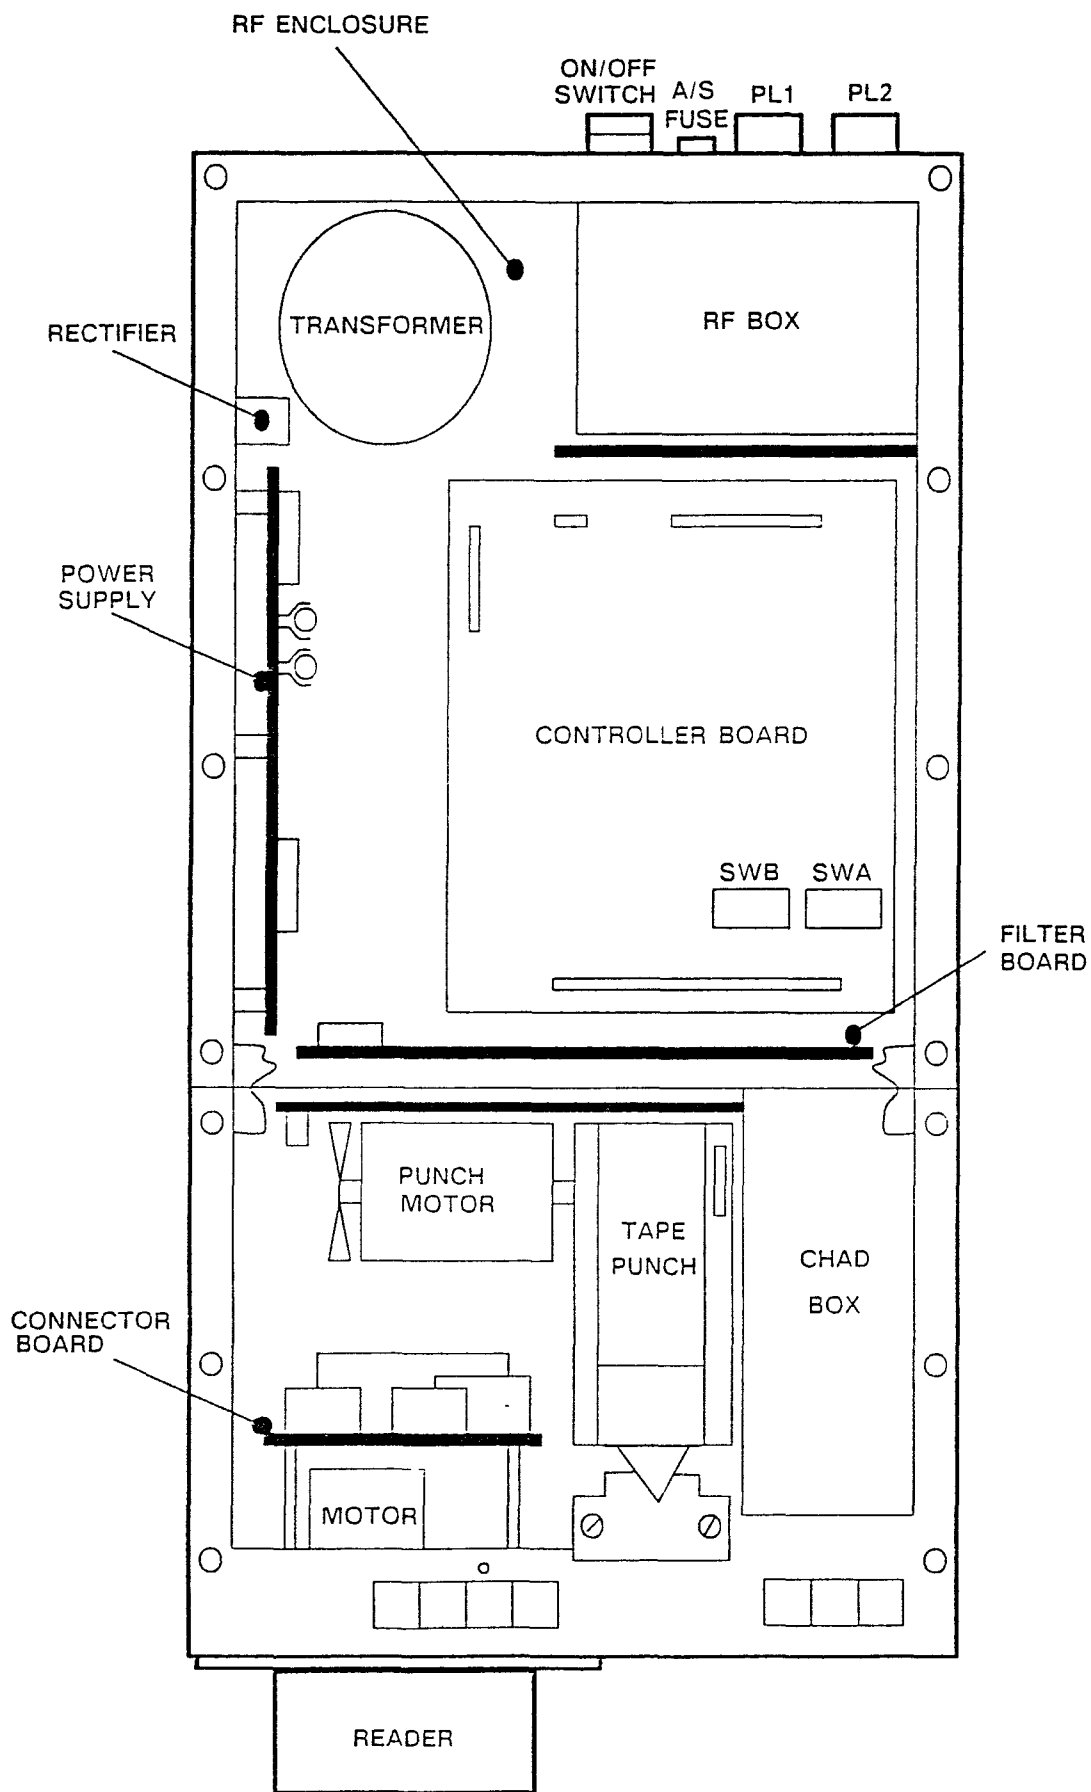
B.1.1 PAPER TAPE ATTACHMENT - MODULE LAYOUT DIAGRAM
